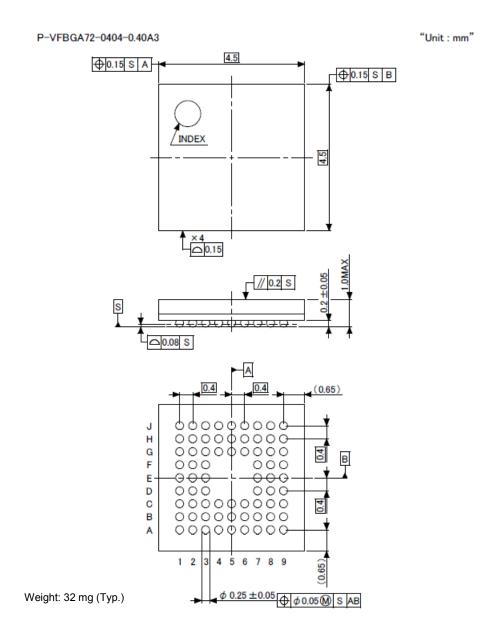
TC358768AXBG P-VFBGA72-0404-0.40A3 package
